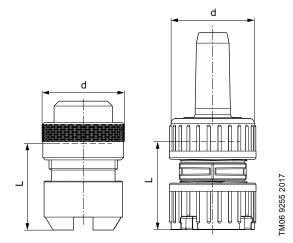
Foot valves: stainless steel (left), PE/PVDF (right)
